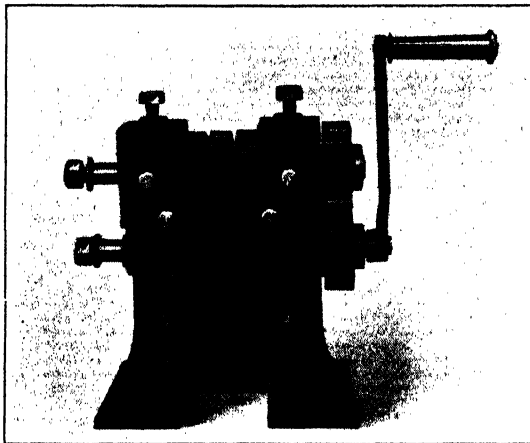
CRIMPING MACHINE—ROBERTSON.
